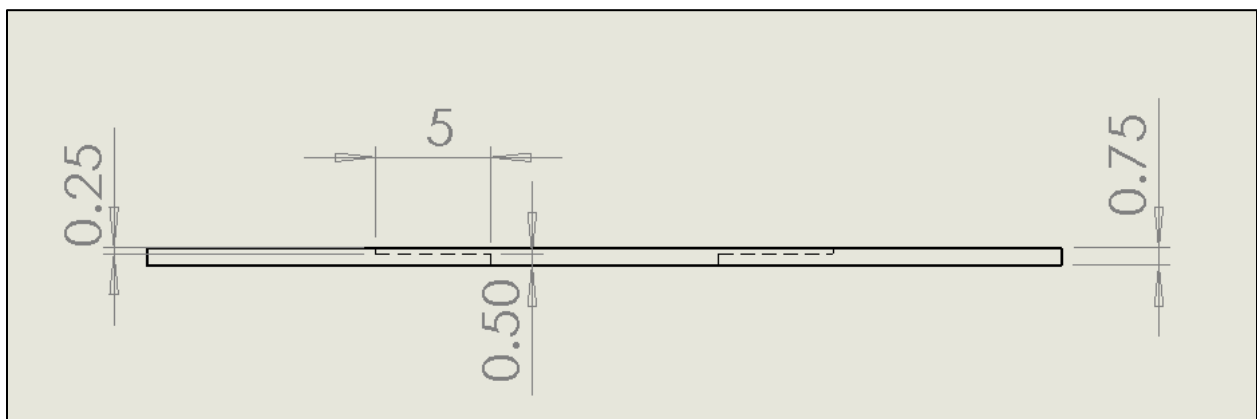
Engineering drawing of side view of CAD model 3D printed gasket with relevant dimensions displayed.
